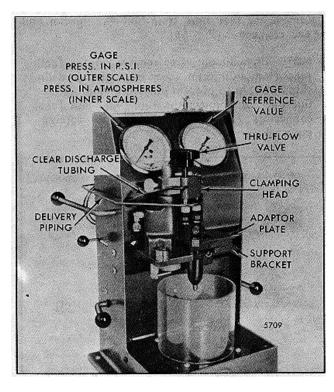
Injector Installed in Tester J 23010 with Clamping Head
